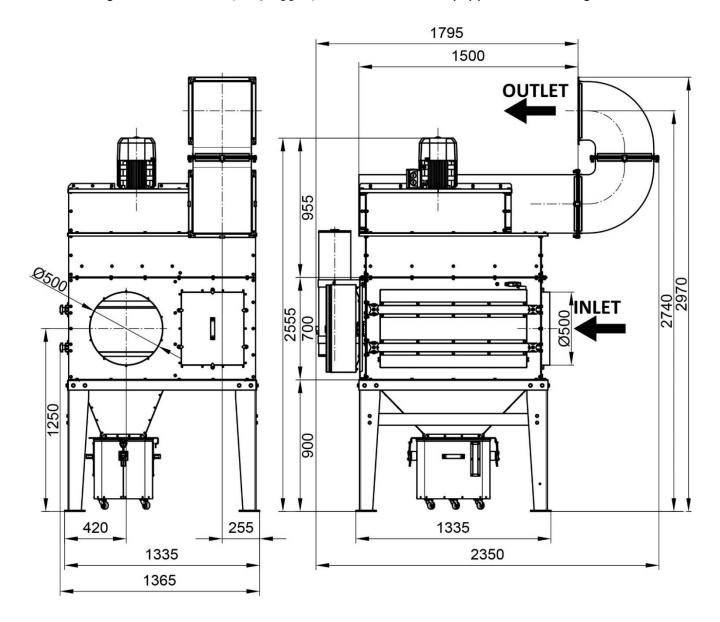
UFO-A-5000 RH (with the air inlet on the right side) - dimensions
